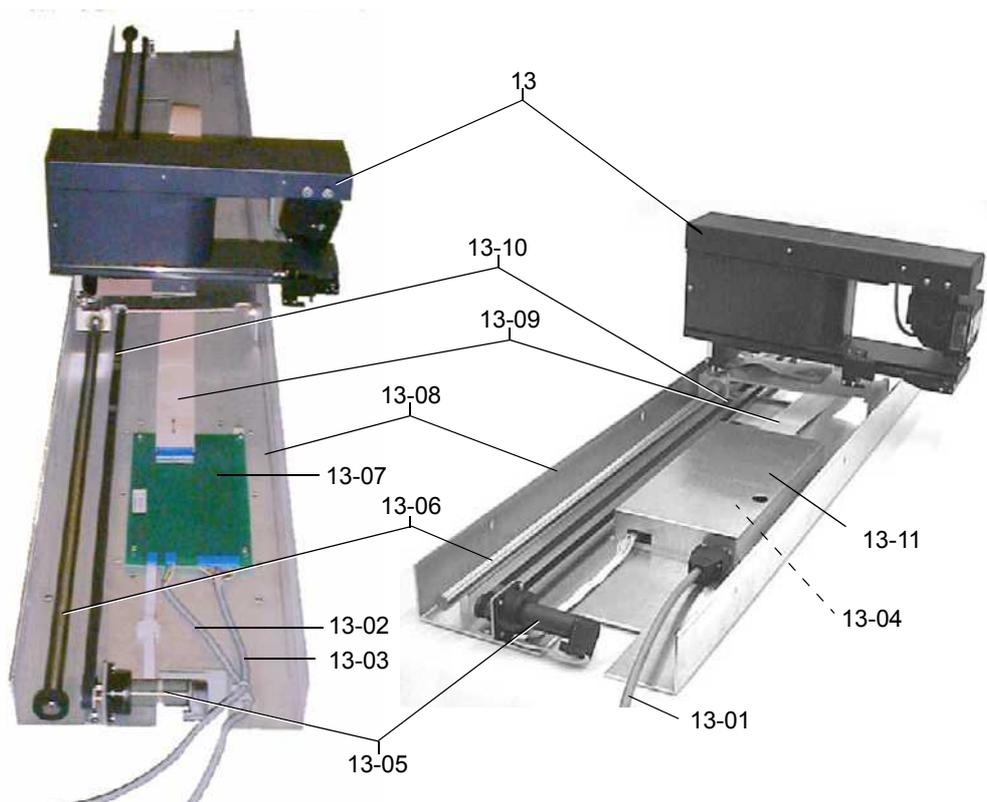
PosID 2 assembly: new version (left) and older version (right)
